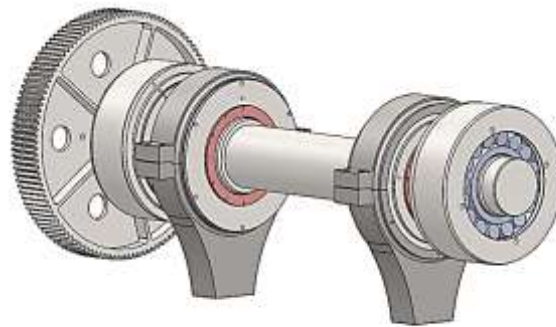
Crank-Slider Mechanism and Eccentric shaft
